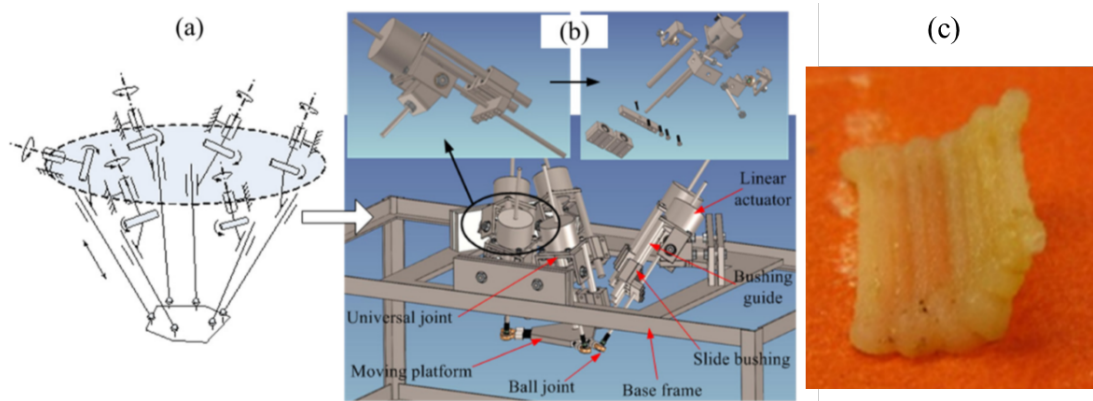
(a) Schematic mechanism of a Stewart mechanism and (b) the CAD design on their system showing the rods, universal joints and ball joints which limit workspace. (c) A sample printed with the system shows how angled layers can be printed but this sample could be printed using an unmodified FFF printer. From [105].
